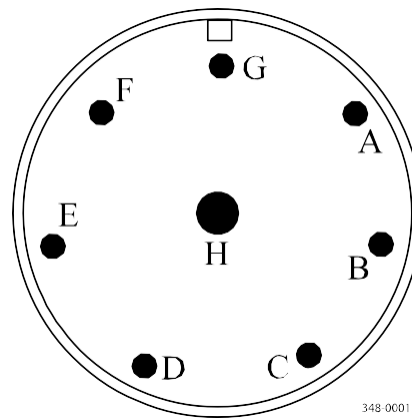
Calibration Assistant Connector (Pin Side View)
